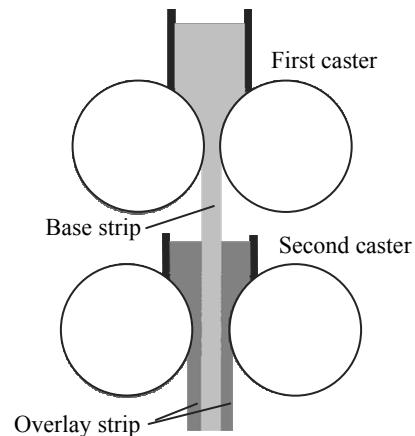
Schematic illustration of the vertical tandem type roll caster to cast three layers clad strip
